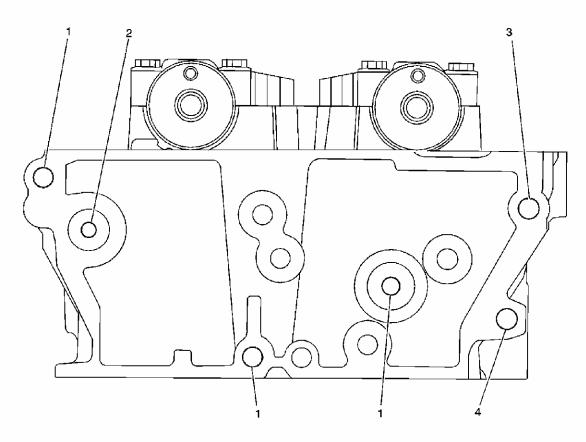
View Of Left Cylinder Head Front Face Courtesy of GENERAL MOTORS CORP.
